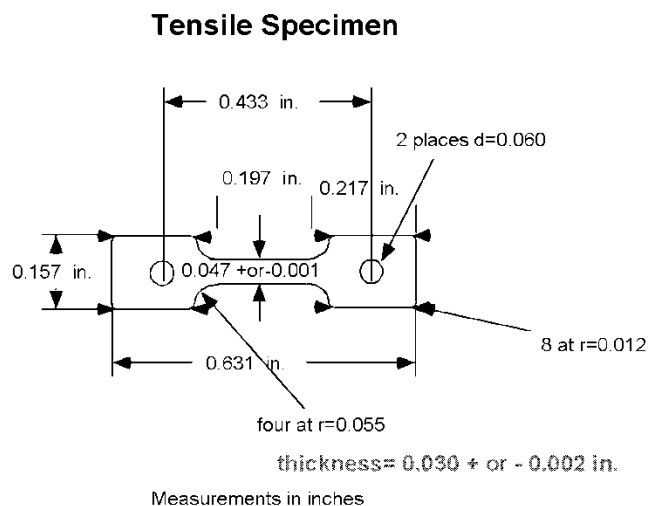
, Geometry of S-1 Tensile specimen, most specimens were .75mm (.030") but some of the cold duct samples were cut to 0.5mm (.020").
